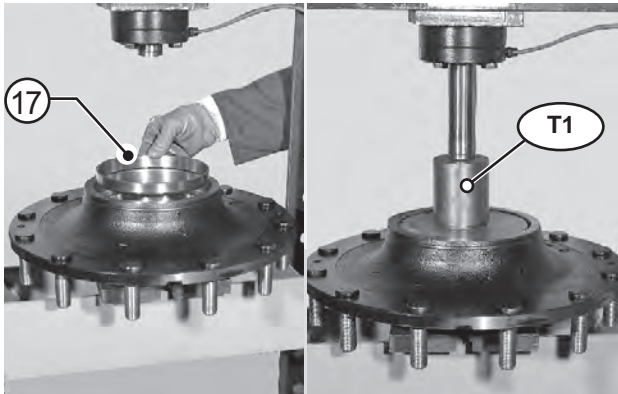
Position the wheel hub (16) under a press; lubricate the seat of the bearing cones (14)(17) and, using tool T1 (See drawing T1 p. 25), install the bearing cup of the bearing cone (14)(17).
